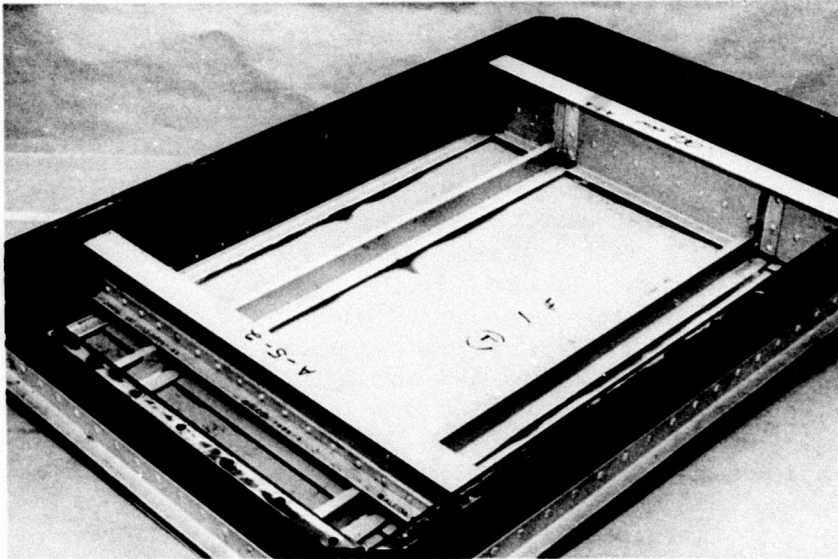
Bond and Rivet Failures at Downstream I-Section Stiffener of Panel A-5-2
